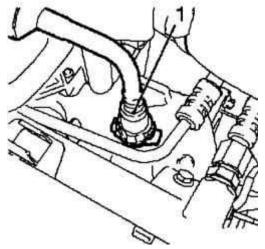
Hose brake booster vacuum line: 1 - hose
